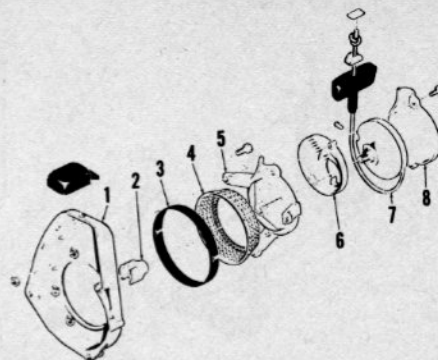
Exploded view of recoil starter used on models CP125, SP125, SP125C, PM105 and SP105.
